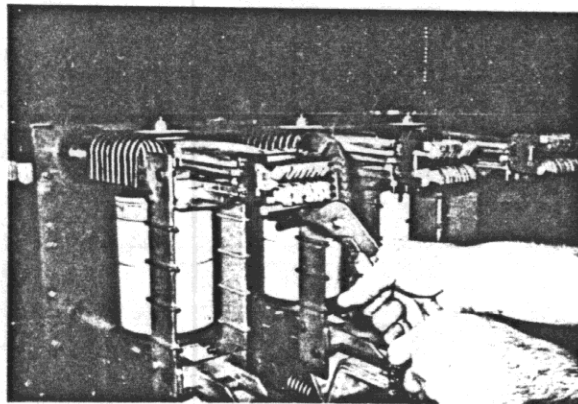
Remove Bottom Insulator Mounting Bolts
